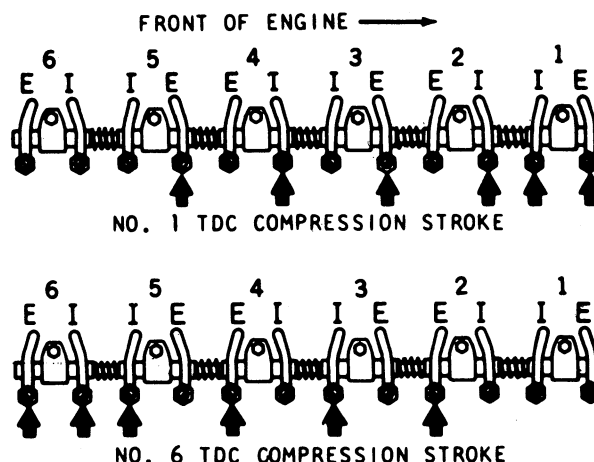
Adjust valves indicated by arrows in upper half of Fig. when number 1 piston is at TDC on compression stroke. Adjust remainder of valves indicated in lower half of Fig. when number 6 piston is at TDC on compression stroke.
